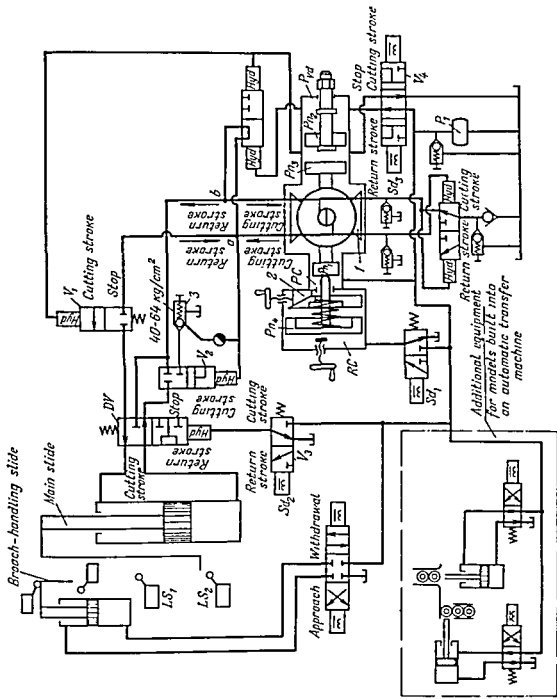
Hydraulic circuit of a vertical internal broaching machine
